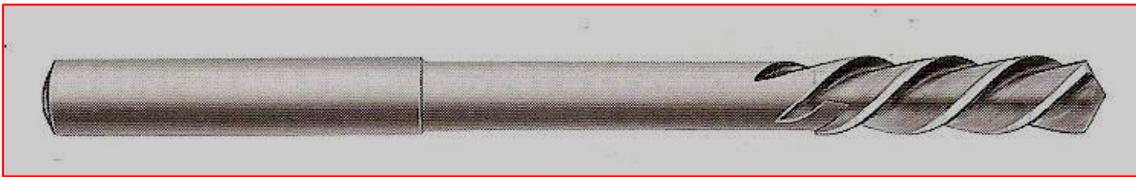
Reamer with descending cutting edges_in carbide (Cerin)
